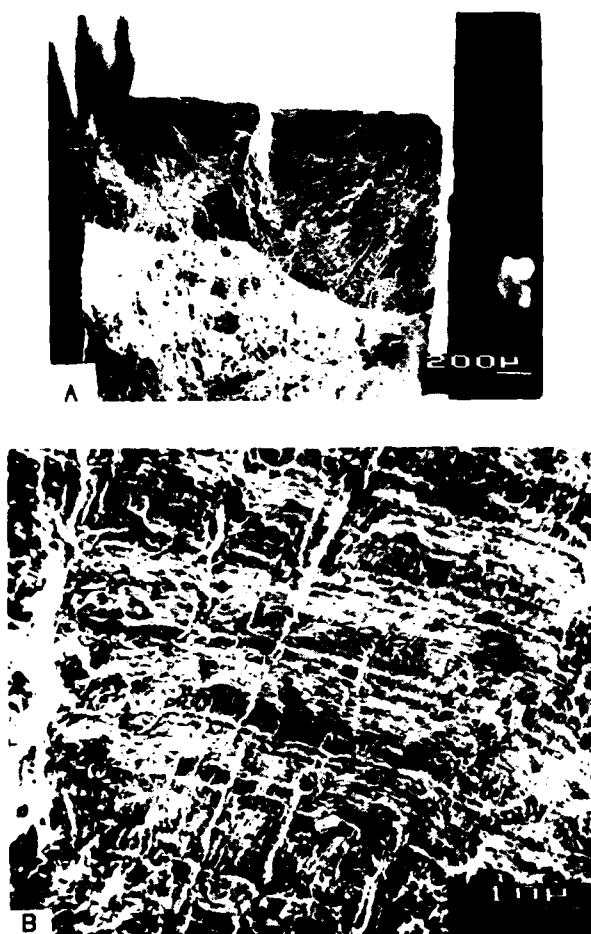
FRACTURE MORPHOLOGY OF BOLT HOLE CRACKS IN 5TH STAGE
